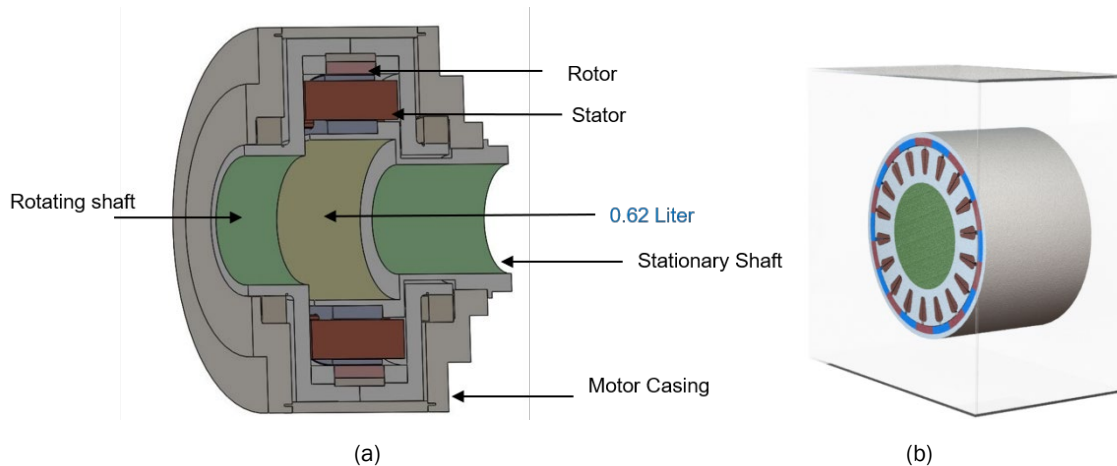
(a) Outer rotor motor structure and (b) internal stator mount integration technique for the outer rotor motor.
